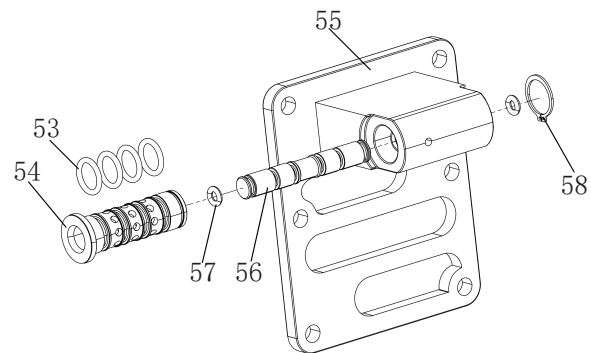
Disassembly of Pilot Valve 导向阀拆卸
